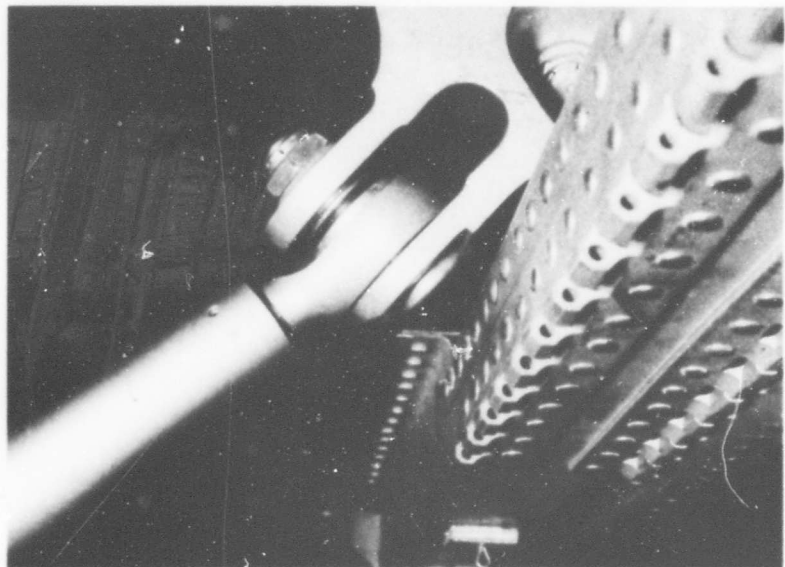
Front View of Same Rod End Showing Bearing Slippage
